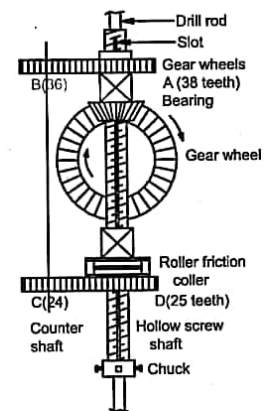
(b) A screw feed head on a diamond core drill Engine
